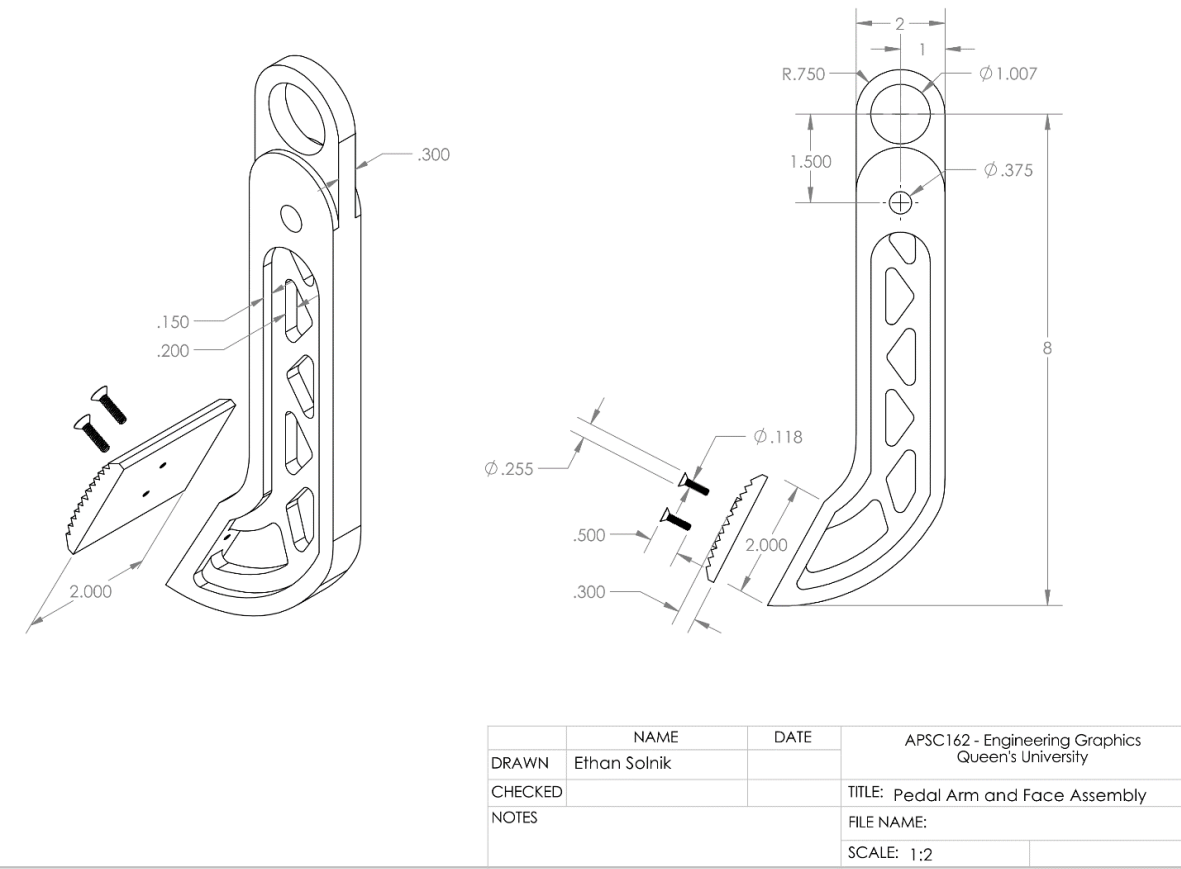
SolidWorks Drawing of Final Pedal Assembly Design
